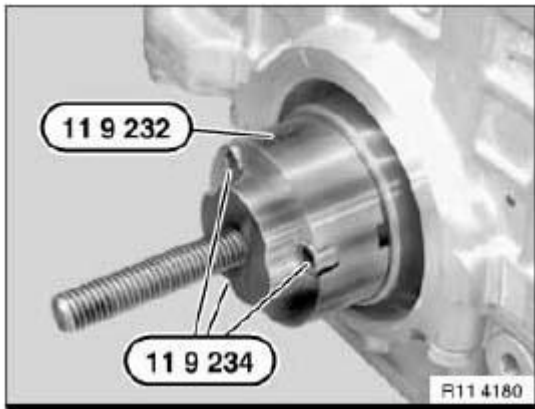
Identifying Special Tool 11 9 232 And 11 9 234
